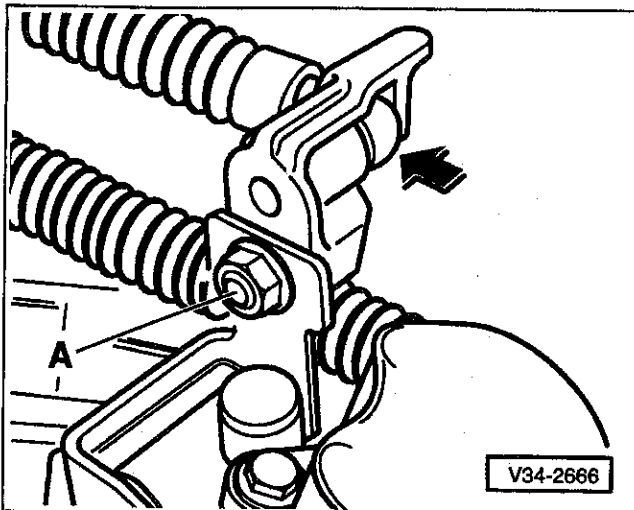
Actuating arm/gate selector cable mounting nut (A). With nut loosened, press lightly on actuating arm (direction of arrow) and retighten nut.
